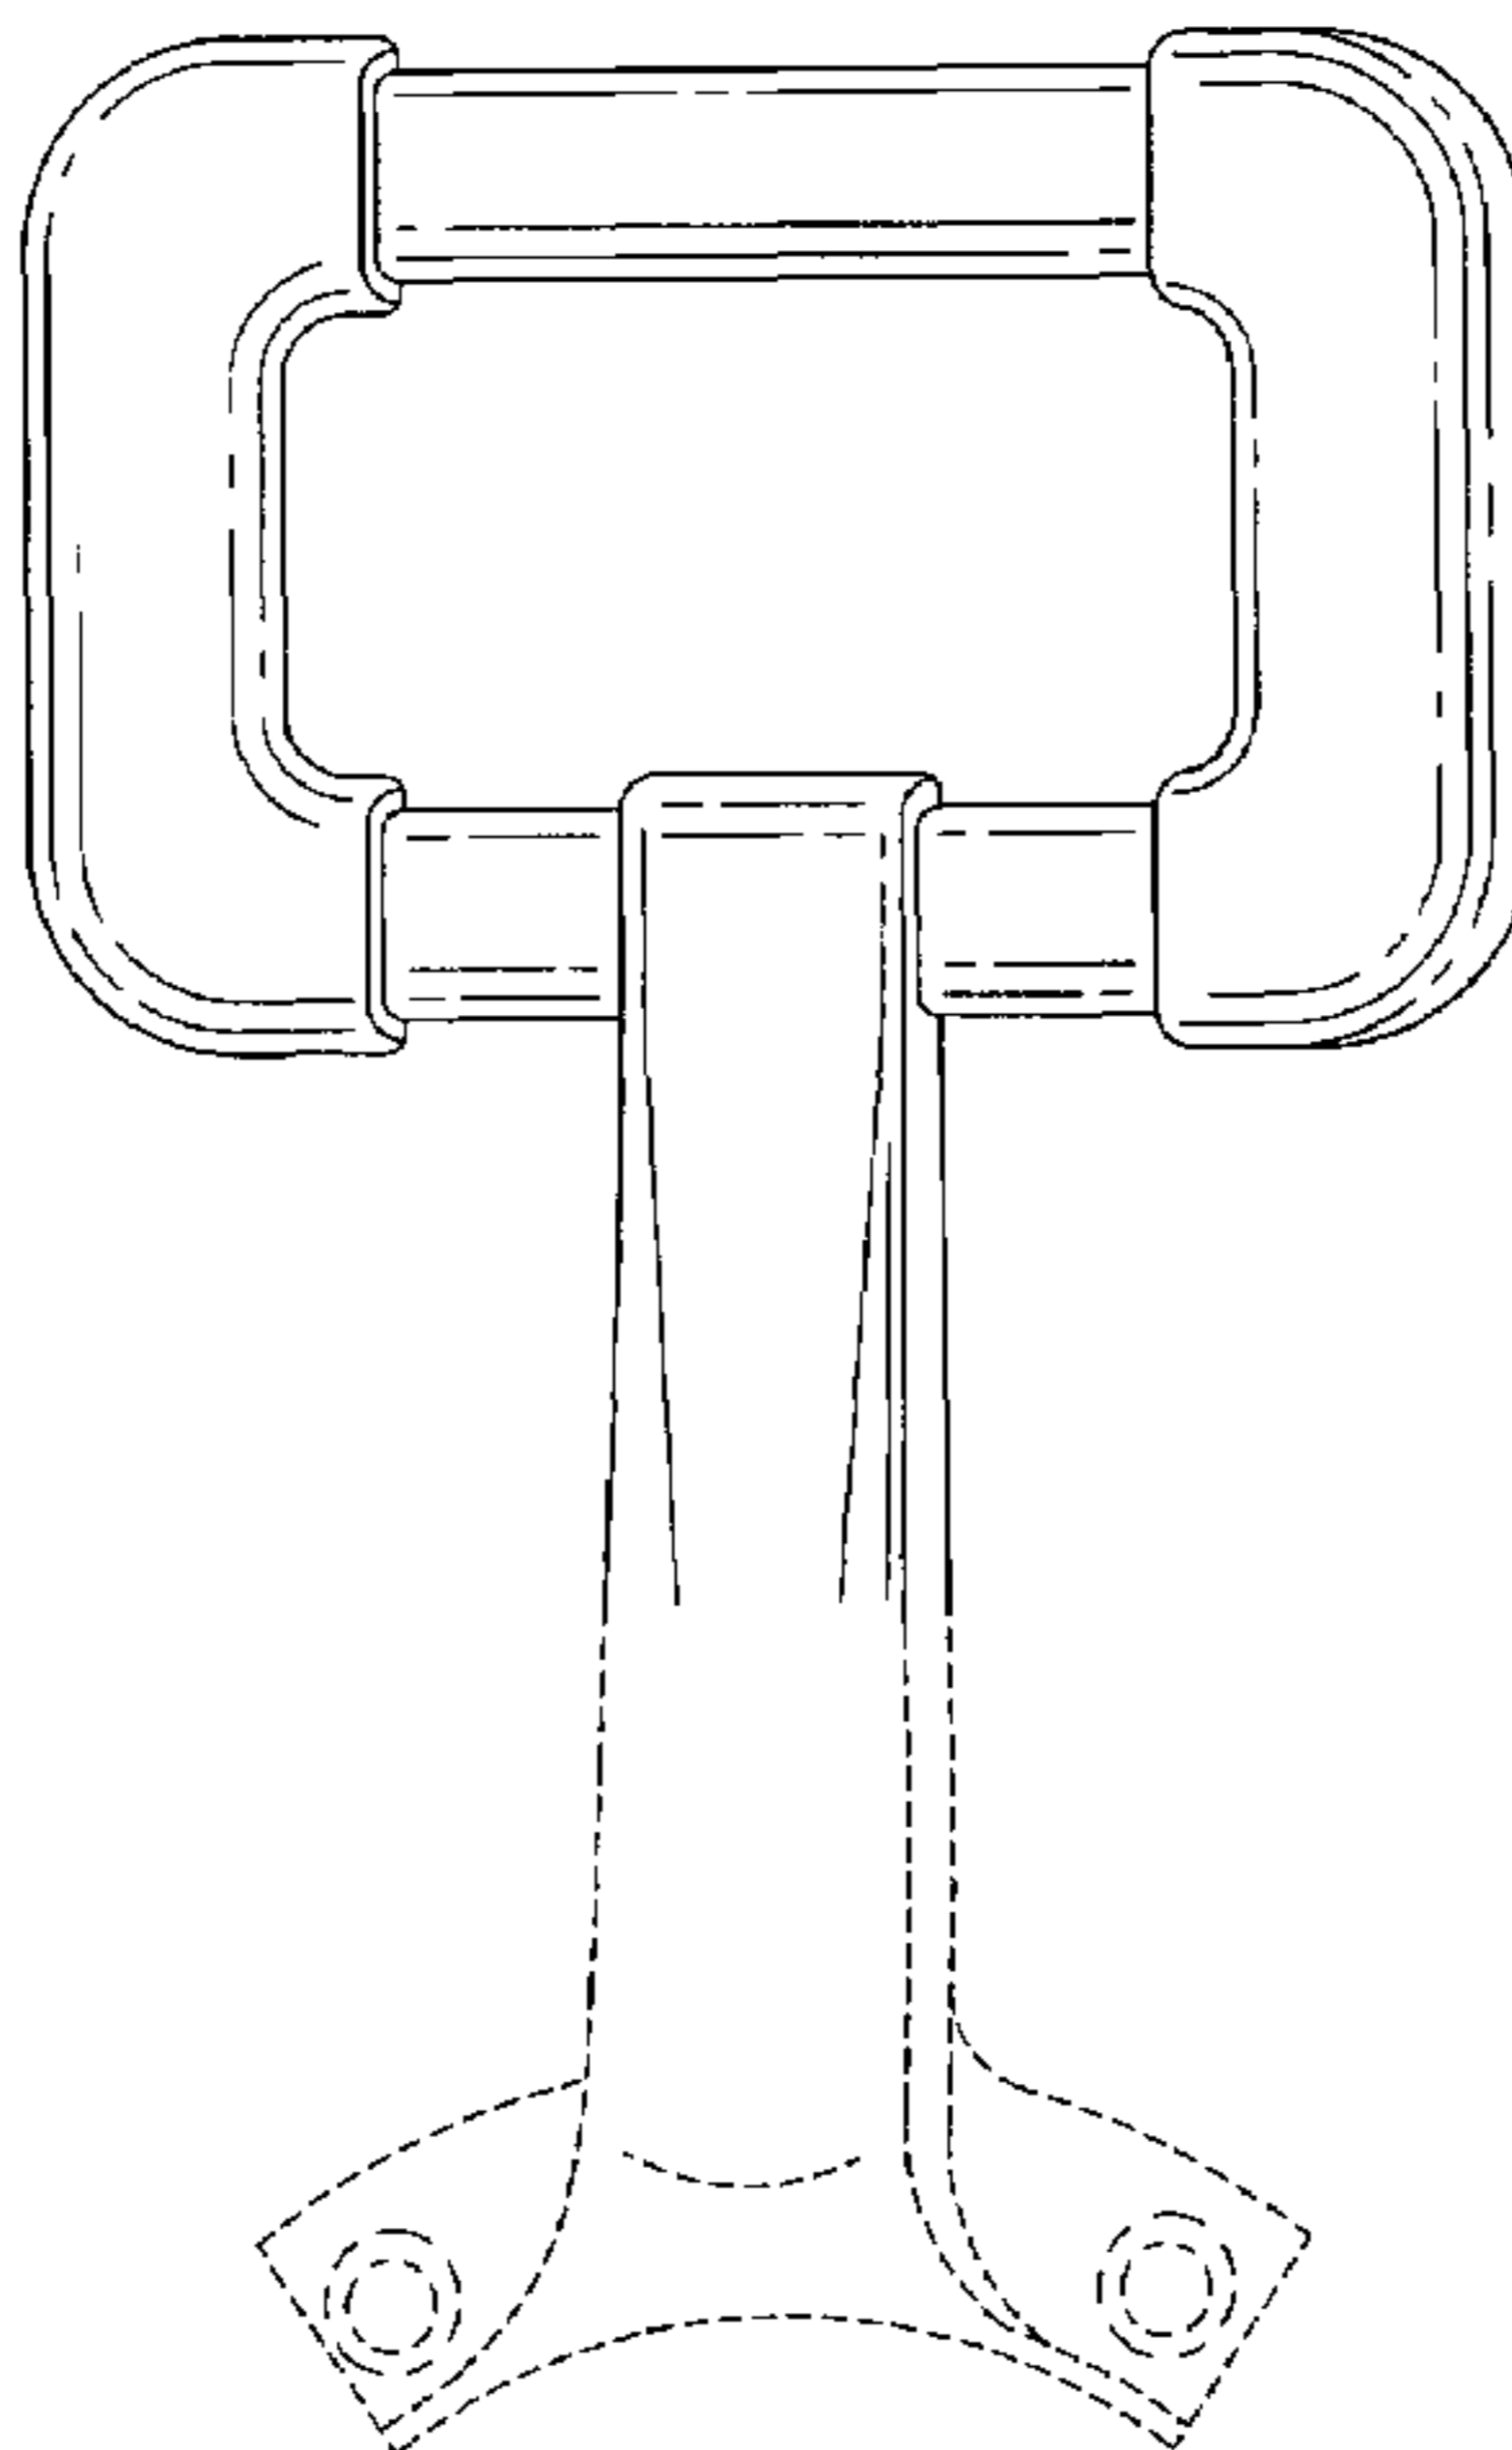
is a front elevational view showing the design for the fan blade holder of FIG. 1;
